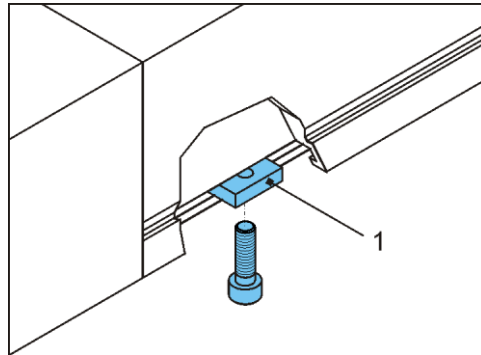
Sliding blocks (1) in the slot on the underside of the basic profile
